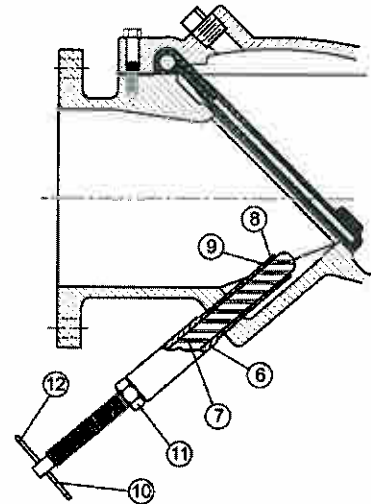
BACKFLOW ACTUATOR ASSEMBLY
